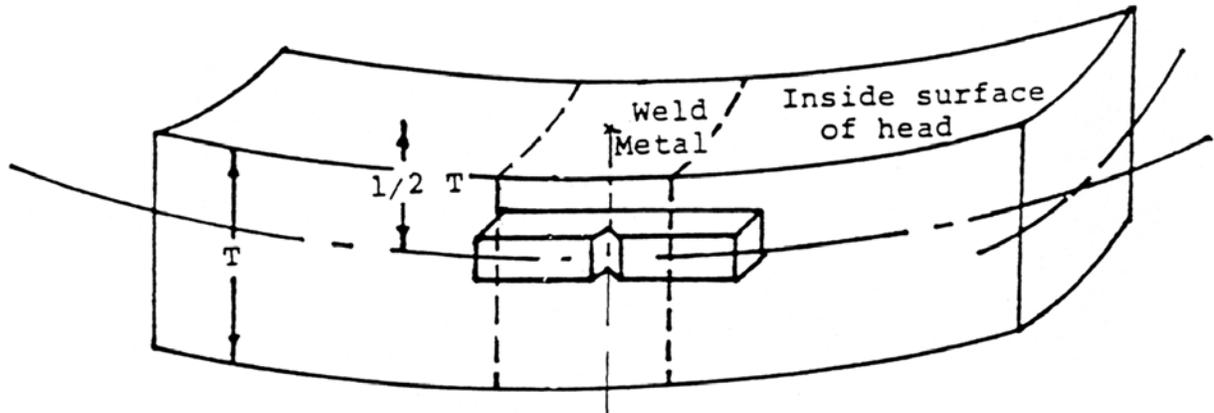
Location and orientation of weld metal Charpy and dynamic tear impact specimens on two-piece heads (See I.4.4.2 for details on test specimen location)
